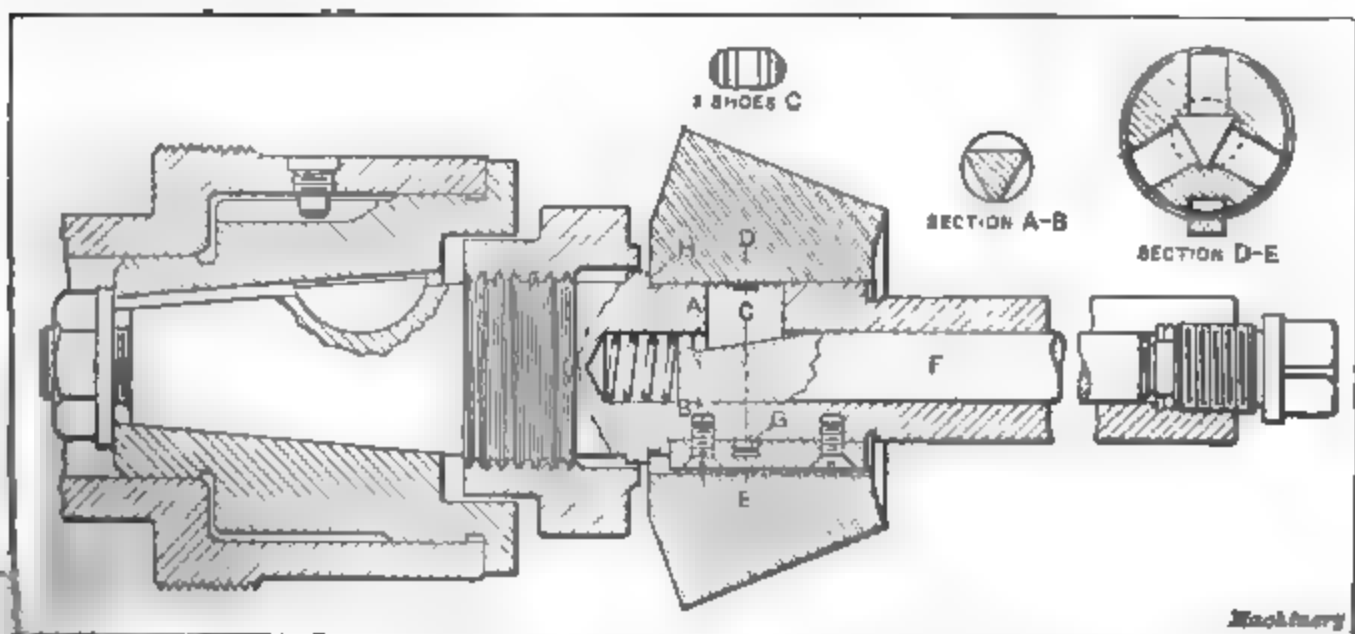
Arbor for Pinion Blanks, equipped with Three Expanding Shoes
